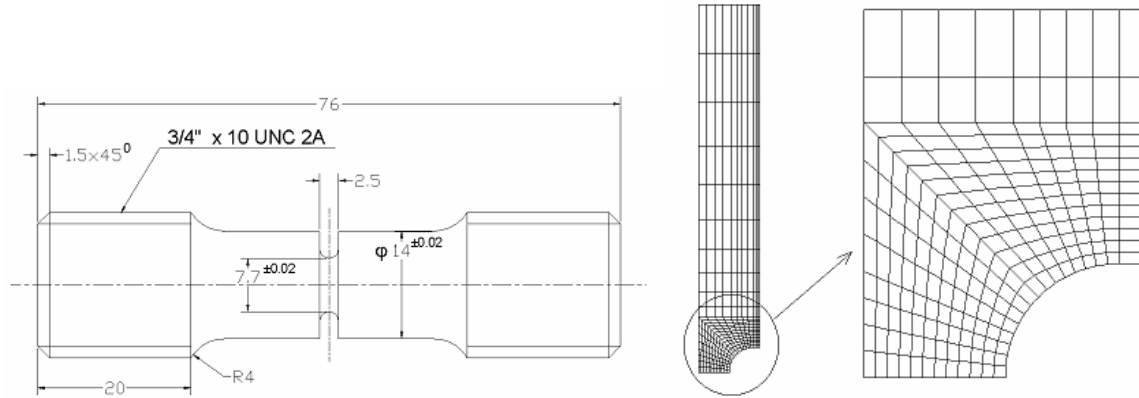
Dimensions of notched tensile specimen and FE model of grooved tensile specimen showing enlarged view of grooved region.
